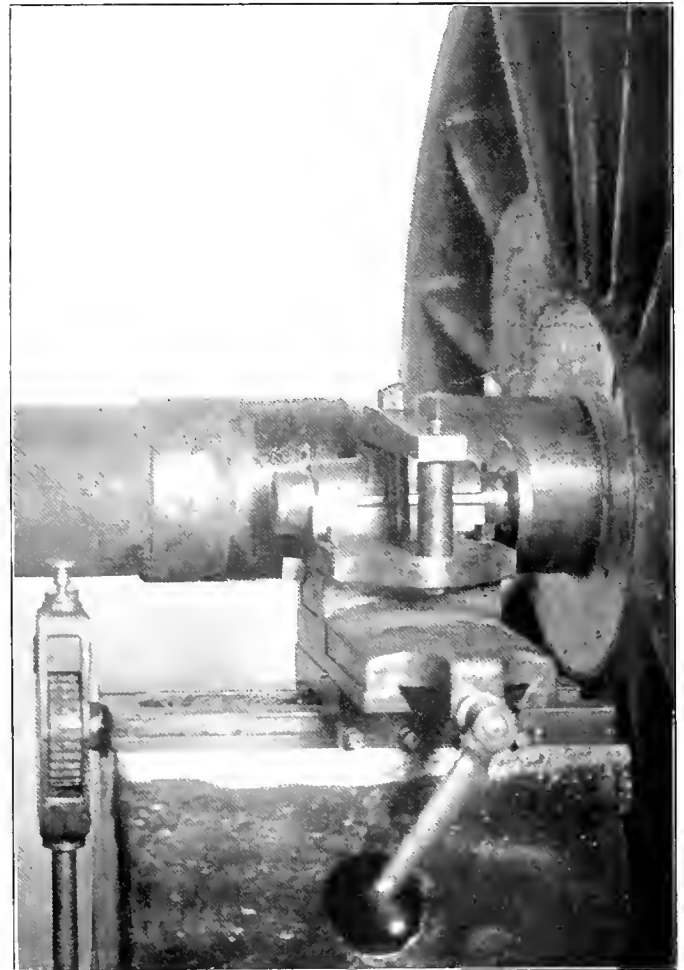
Special Tool Holder on Driving Wheel Lathe for Truing Journals.
